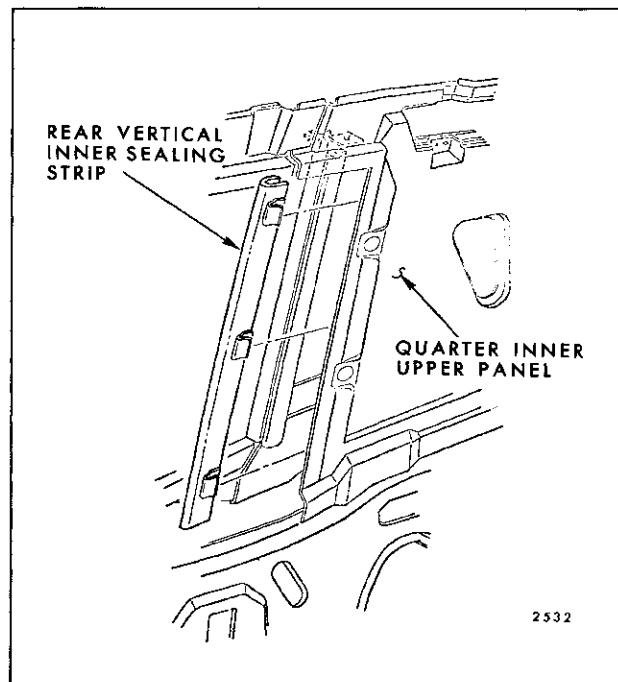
Rear Quarter Window Rear Vertical Inner Sealing Strip Assembly "C-47" Styles
